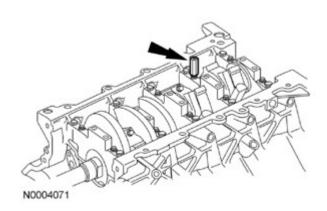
Locating Pickup Tube Spacer Courtesy of FORD MOTOR CO.
